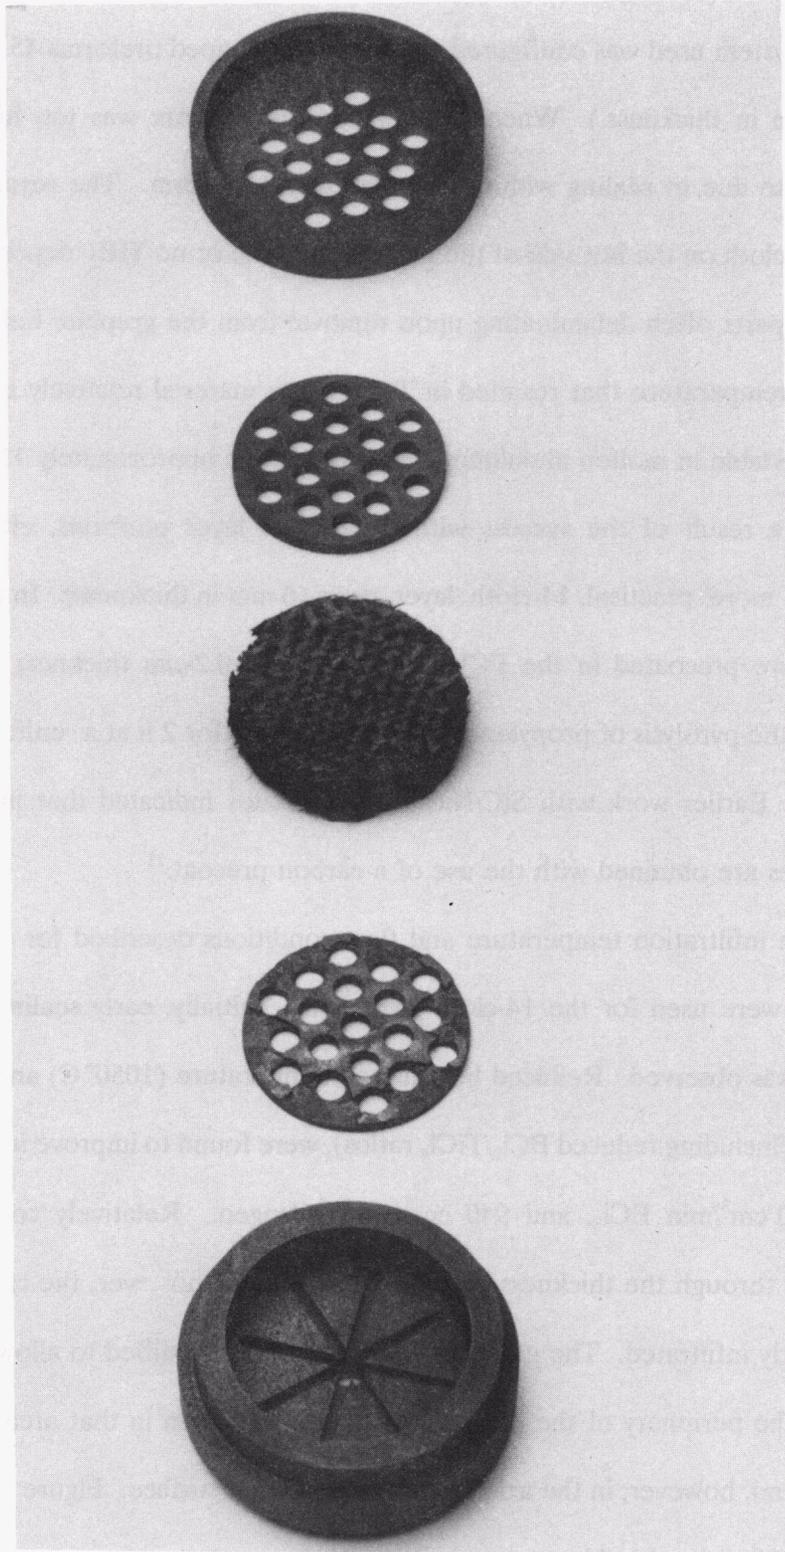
Exploded view of the preform and holder developed for uniform infiltration of 6-mm-thick parts.
